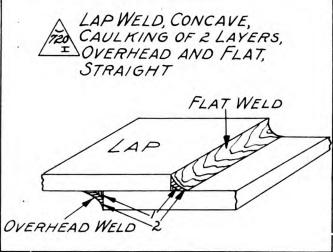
PROPERLY MARKED FLUSH COMPOSITE BUTT WELD WITH DOUBLE BEVEL. FIG. 16-A LAP WELD WITH CONCLAVE CAULKING
